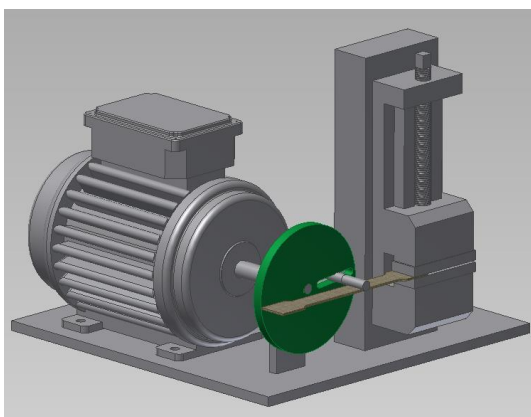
Uni-directionally bended specimen by rotating disc with pin.
